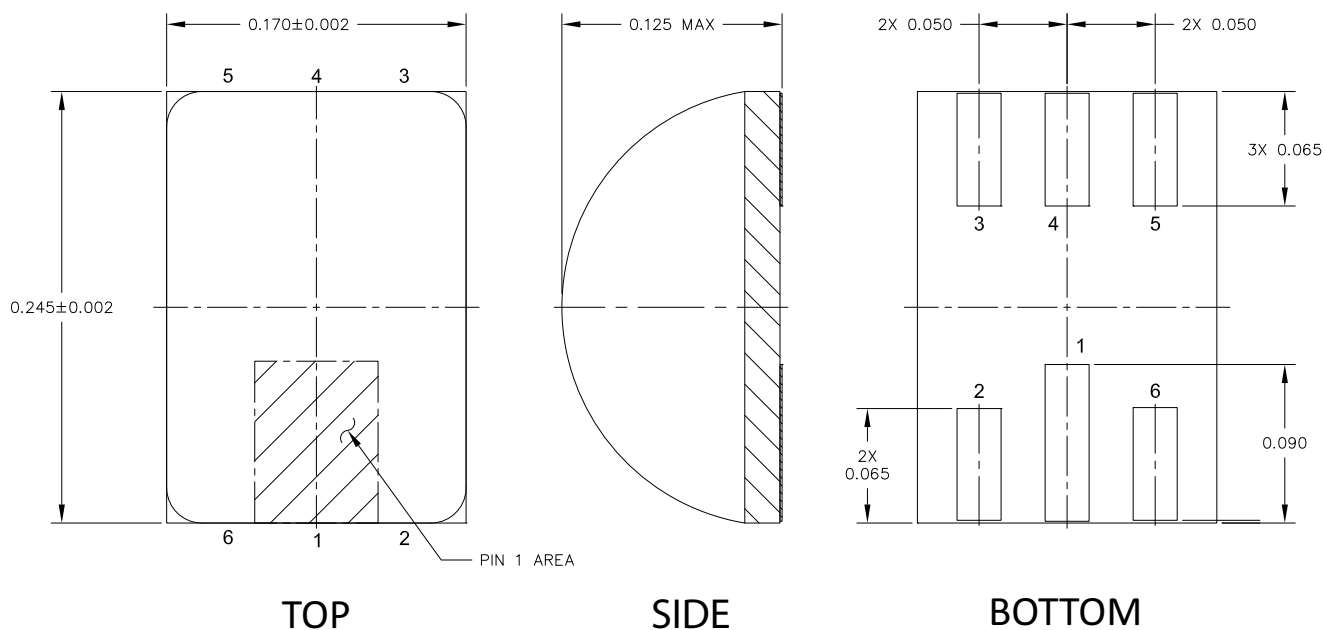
Package Dimensions, 6-Lead Glob Top SMT
